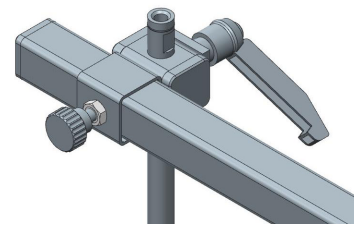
Support arm with knurled nut, clamping lever and mandrel
